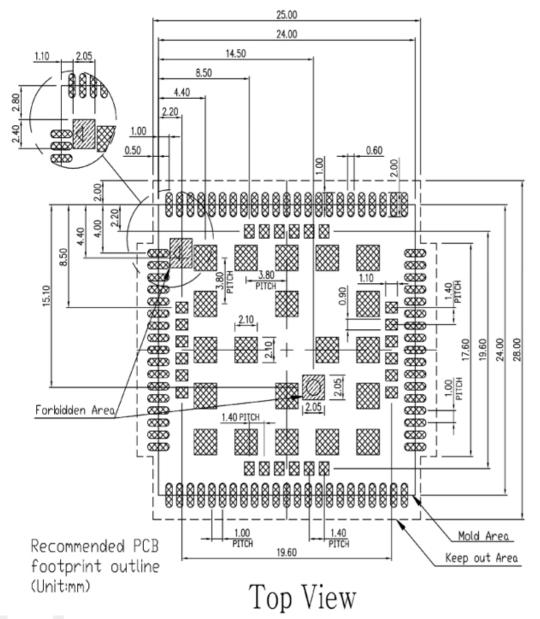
Recommended PCB footprint outline for A7672X (Unit: mm)
